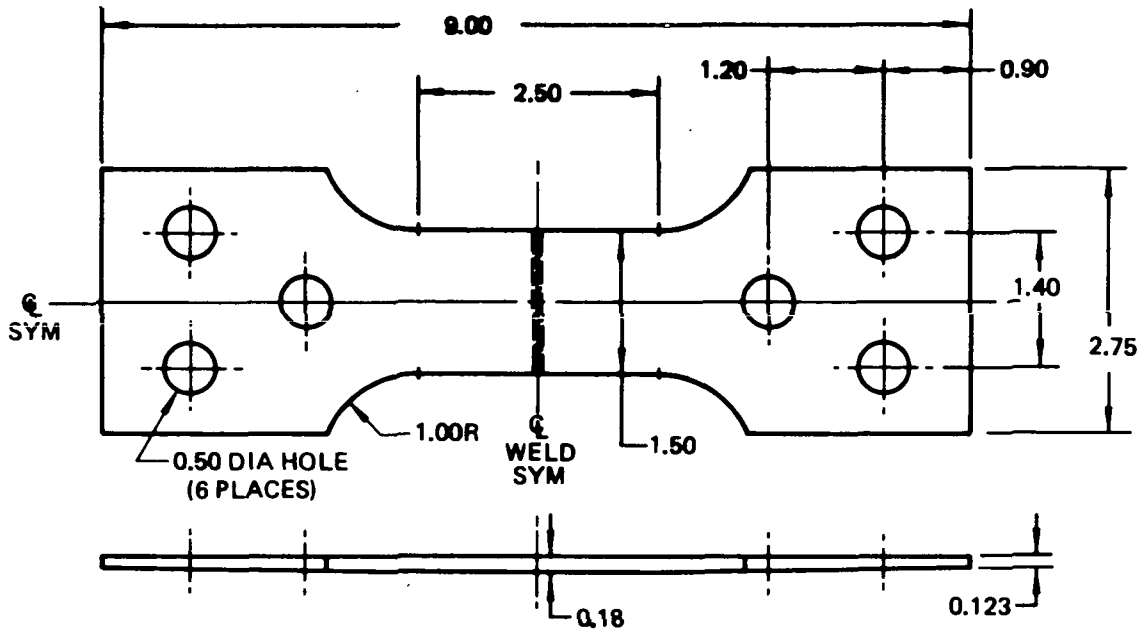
WELDMENT SPECIMENS FROM LM/ECS GOX DESCENT TANKS (TW-XX, SN41-X)
